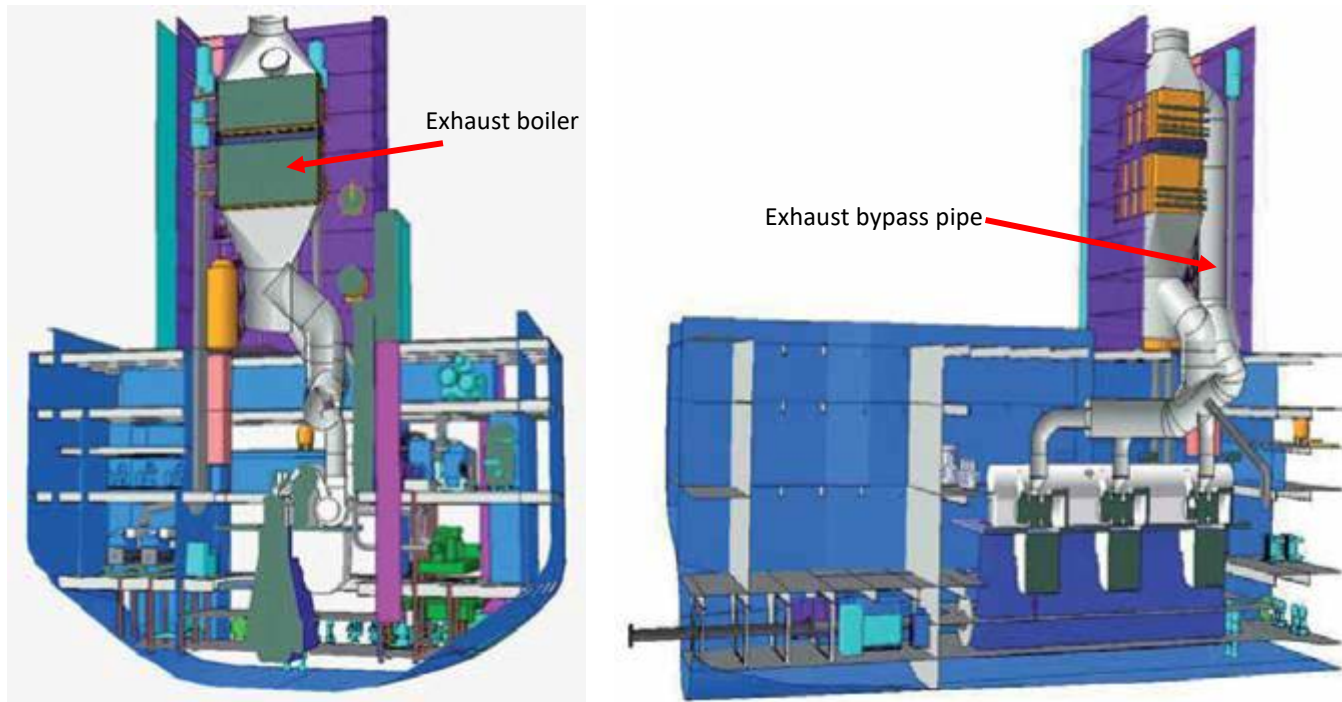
Container ship engine room and casing arrangement (left) transversal section, (right) horizontal section [24]
